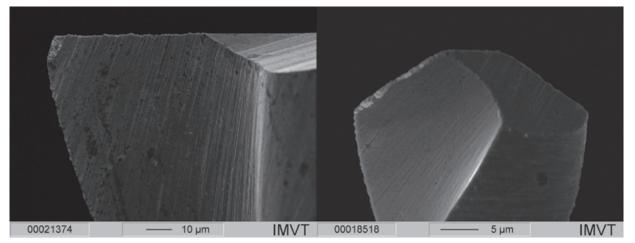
Left: Imperfect cutting edge of an uncoated hard metal tool with d=0.25 mm (by Dixi). Right: Cutting edge of a 30 μm-drill bit (by Atom).
